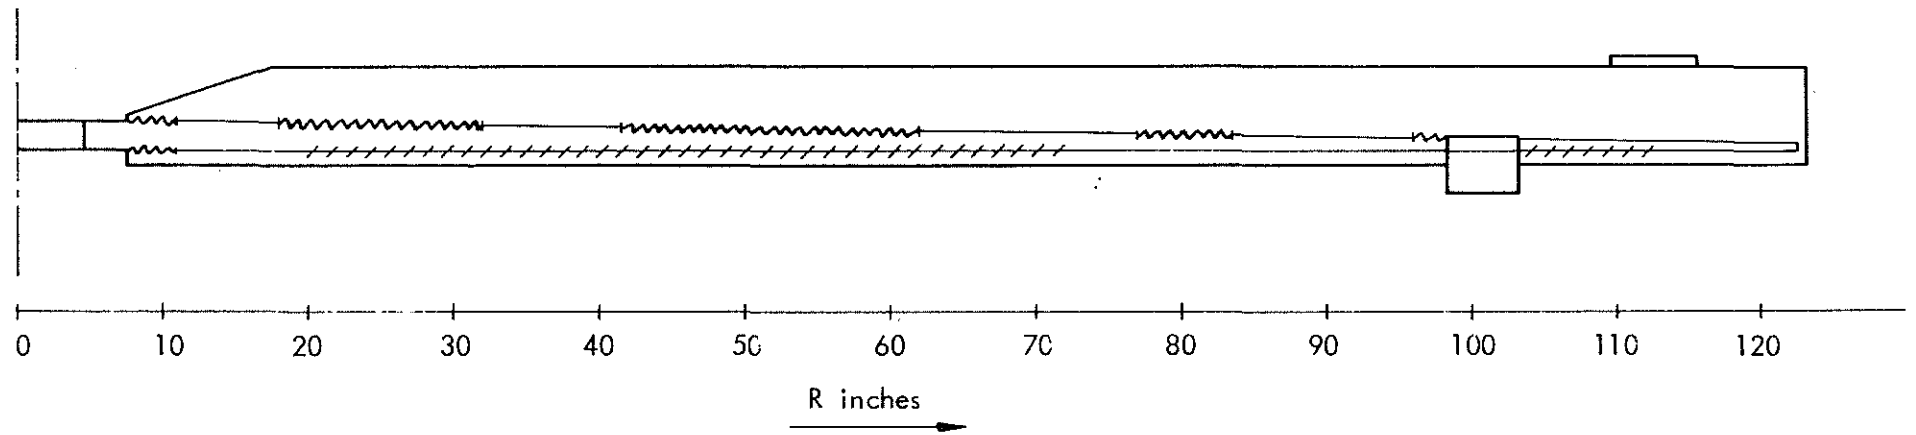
POSITION OF PAINT CRACKS ON THE ROTOR BLADE AFTER THE FLIGHT ON 18-7-74
